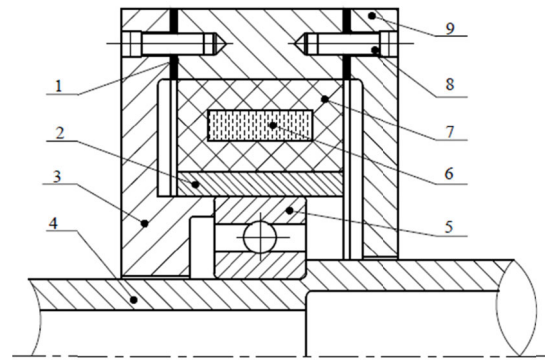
Schematic diagram of installation of rubber-silicone oil combined damper 1- elastic washer; 2- metal bush; 3- left end cover; 4- hollow shaft; 5- bearing; 6-silicone oil; 7-hollow rubber ring; 8-screw; 9-right end cover.
